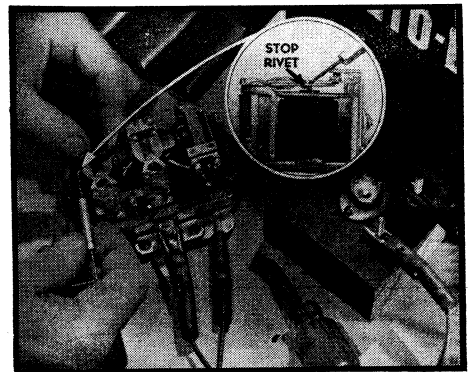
Checking Auto-Lite voltage regulator armature air gap. Insert gauges on the contact side of the stop rivet and press down on the two hinge rivets as shown. The light should burn normally with the larger gauge and dim or go out with the smaller
